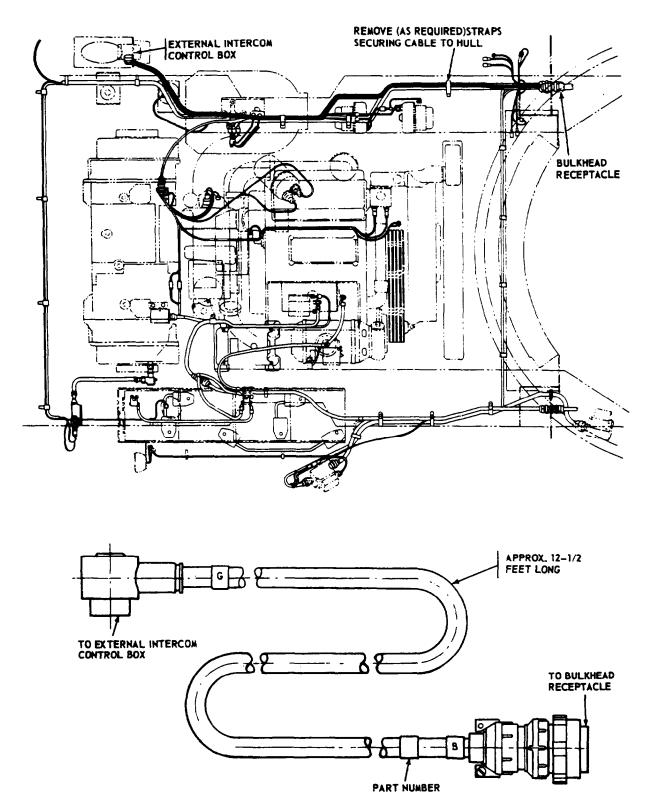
Removal/installation - external intercom control box-to-bulkhead cable assembly (1 of 2).
